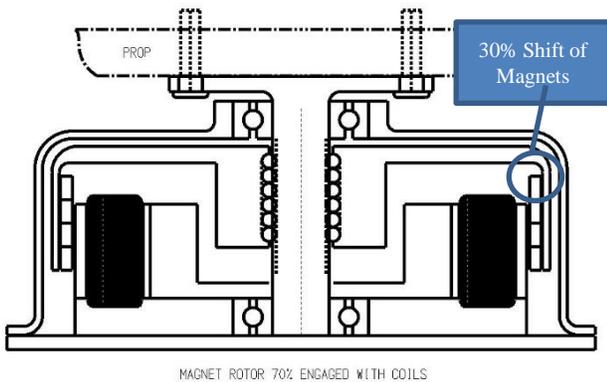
A typical DuraTrac PM motor with rotor magnets 70% engaged (30% shifted) with the stator coils to achieve a 40% rpm increase
